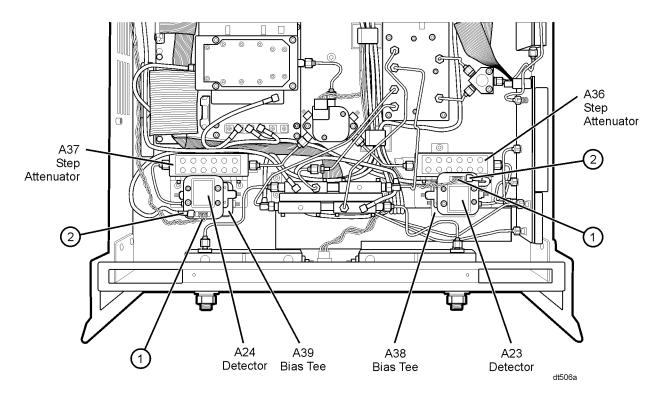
Attenuator and Bias Tee Installation, Bracket Installation
